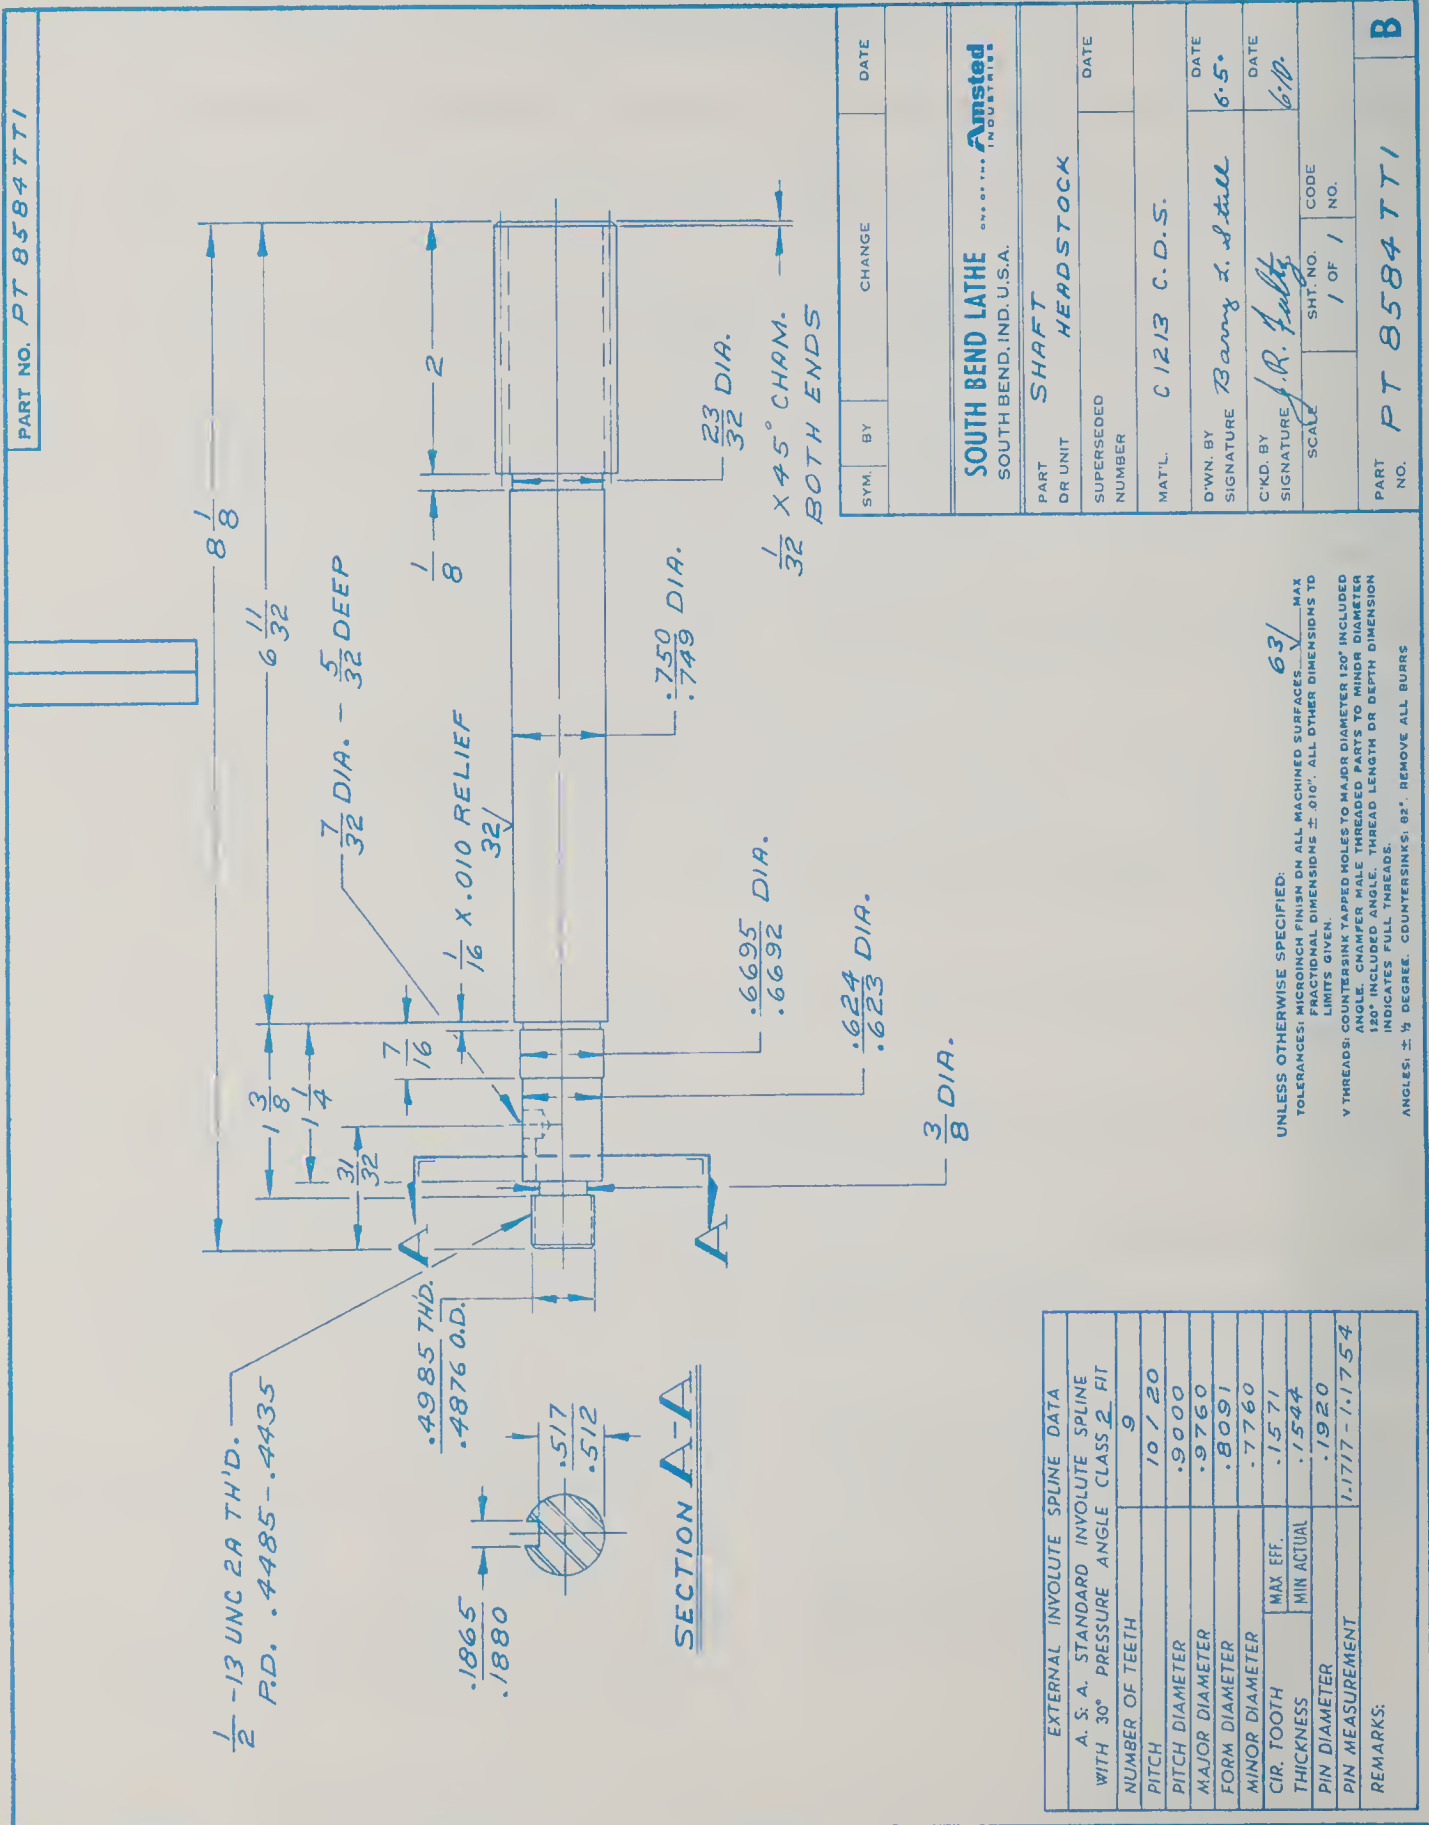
BPR-4. Industry blueprint. (South Bend Lathe)
